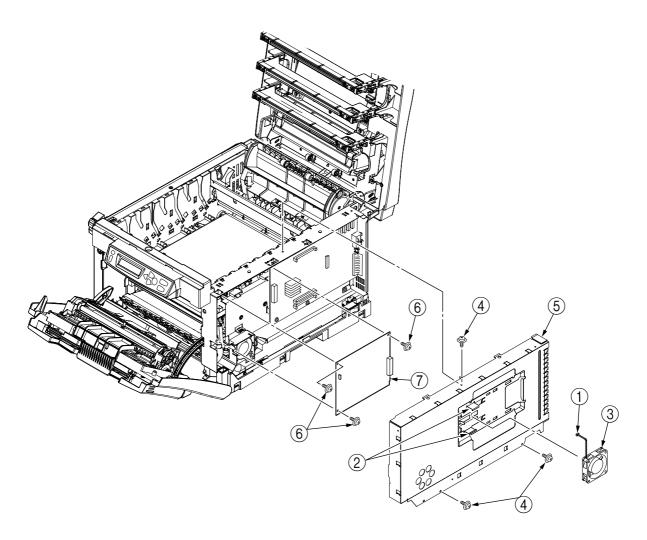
Print Engine Controller PWB (C5300)
